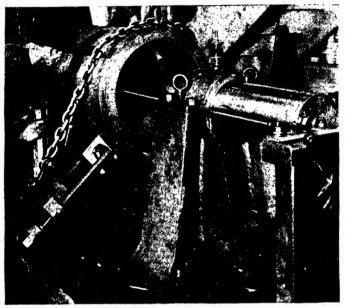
Back end of the machine (Fig. 20) showing support for the boring bar, the screw that feeds the tool, and the star wheel at the end of the screw.
